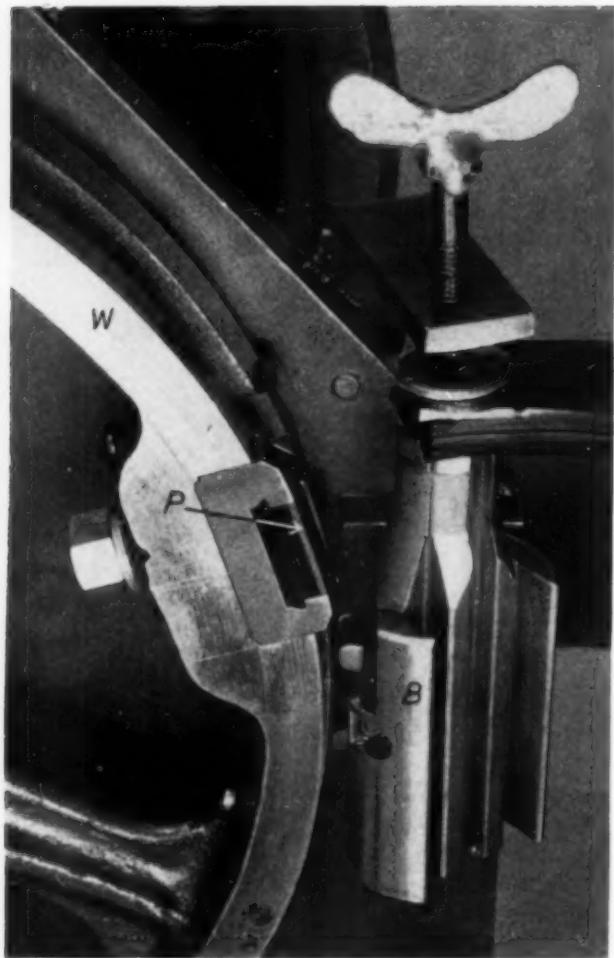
Testing Machine in Position Where Hammer Plate P Is About to Engage Hammer, the Latter Mounted in Breech Block B
